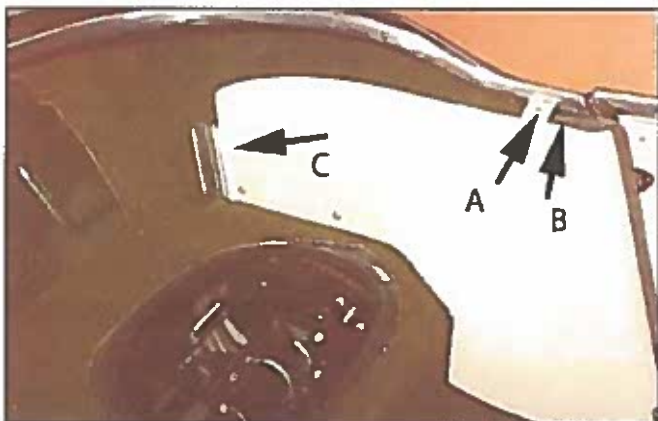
Rear cockpit trim in a BT7. The aluminum finisher plate is yet to be mounted on the trimmed wood block (A). This plate has a channel that extends forward to retain the door seal (B). The bracket (C) provides mounting for the rear seat back.
